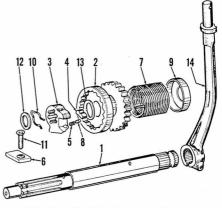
Exploded view of kickstarter assembly. Gear (2) engages gear (14-Fig. BS3-26).
